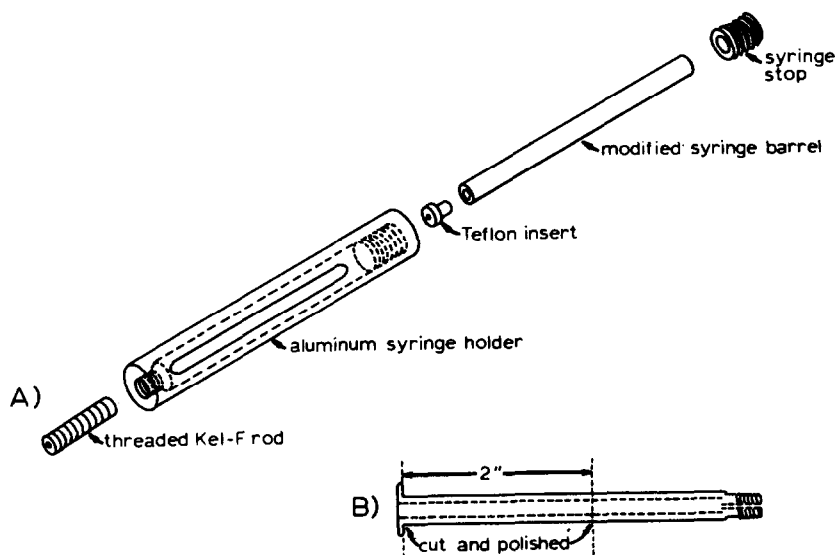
Details of the syringe holder assembly. (A) Exploded view; (B) modifications to glass syringe barrel.
